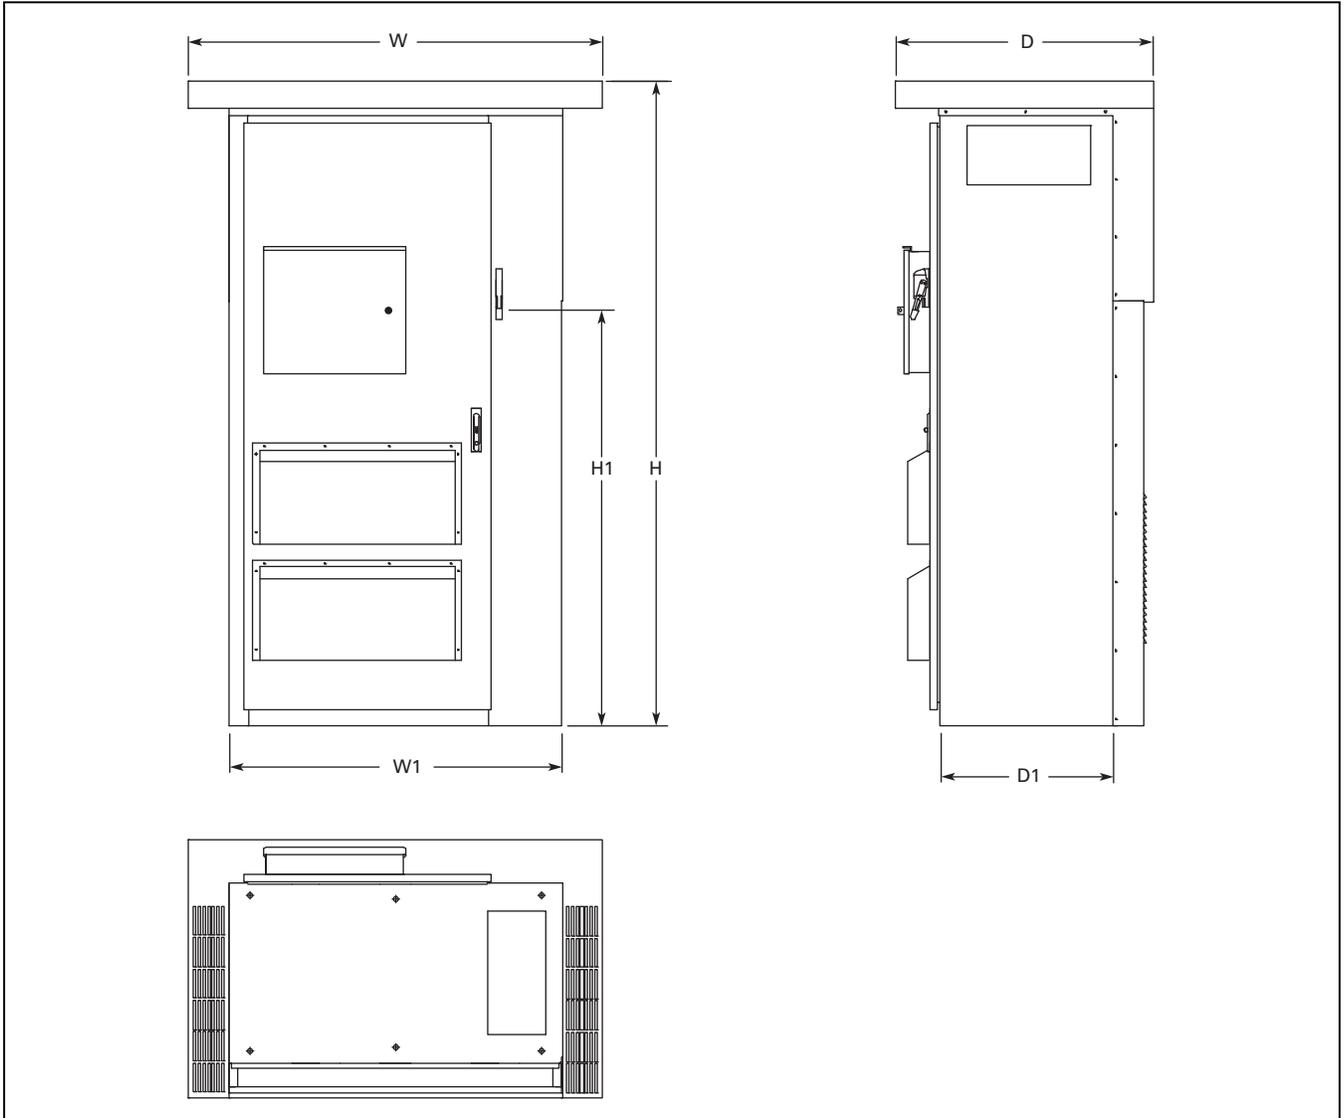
Enclosure Size F—Approximate Dimensions in Inches (mm)
